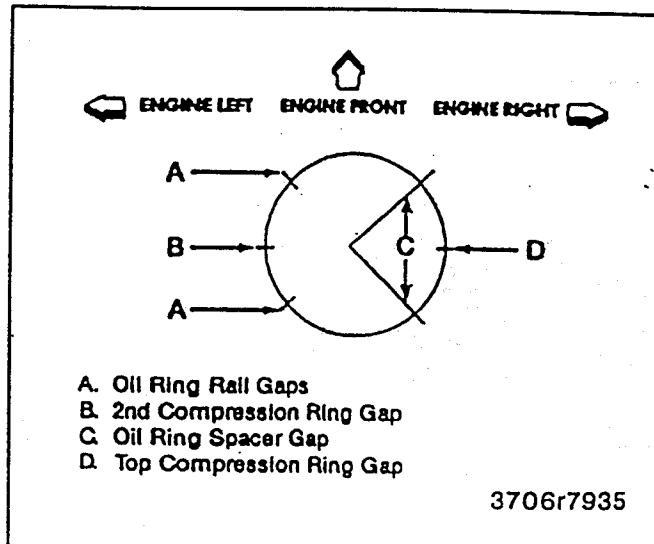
Piston Ring End Gap Location (7.4L Engines)
